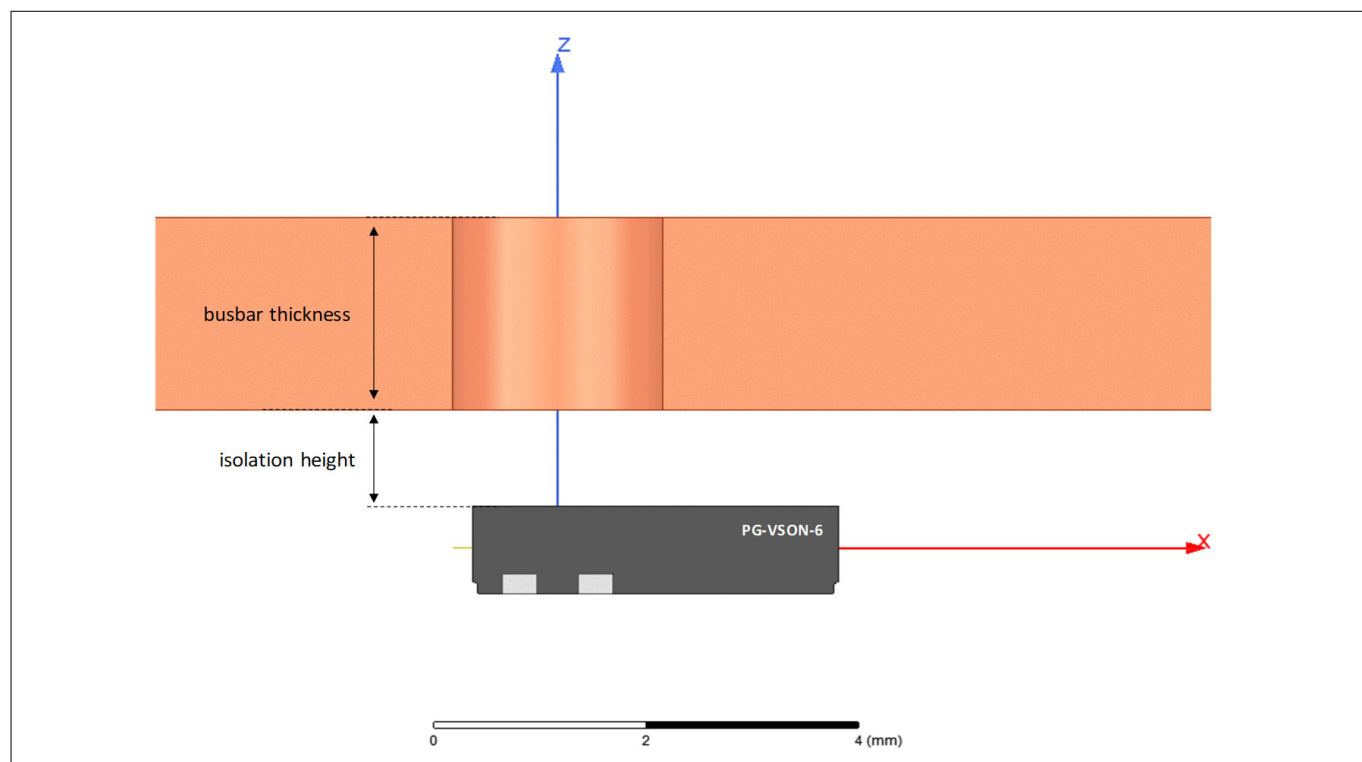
PG-VSON-6 package, busbar support, Straight slit shaped sensing structure, side view
